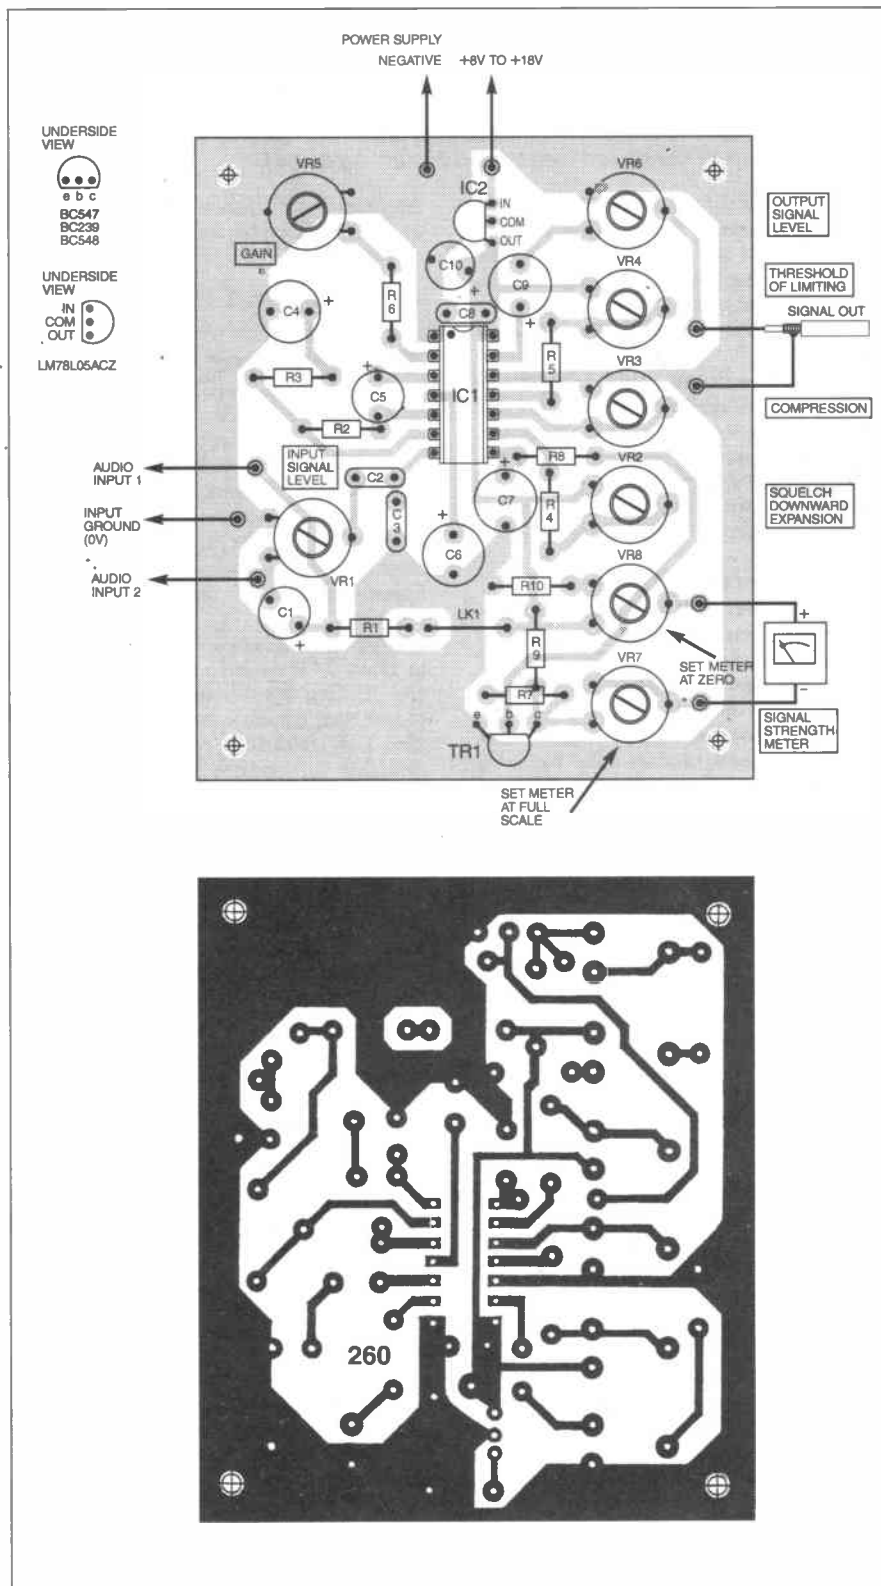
Printed circuit board component layout, interwiring details and full size underside copper foil master.
